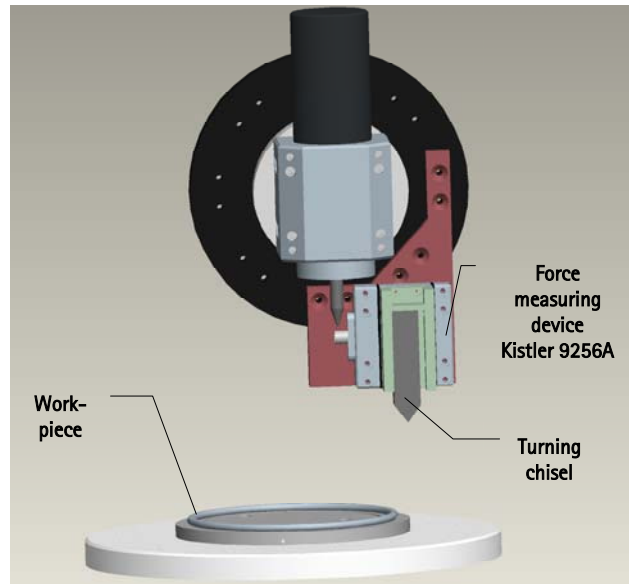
View of experimental layout on the Kugler MicroMaster 2
